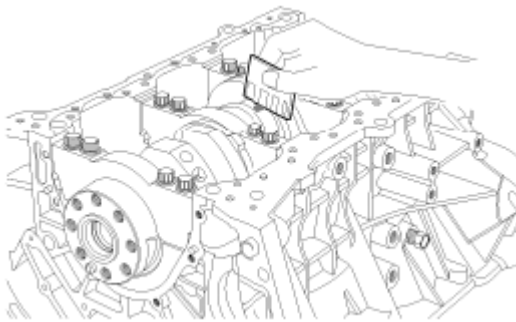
Measuring Connecting Rod Bearing Oil Clearance
